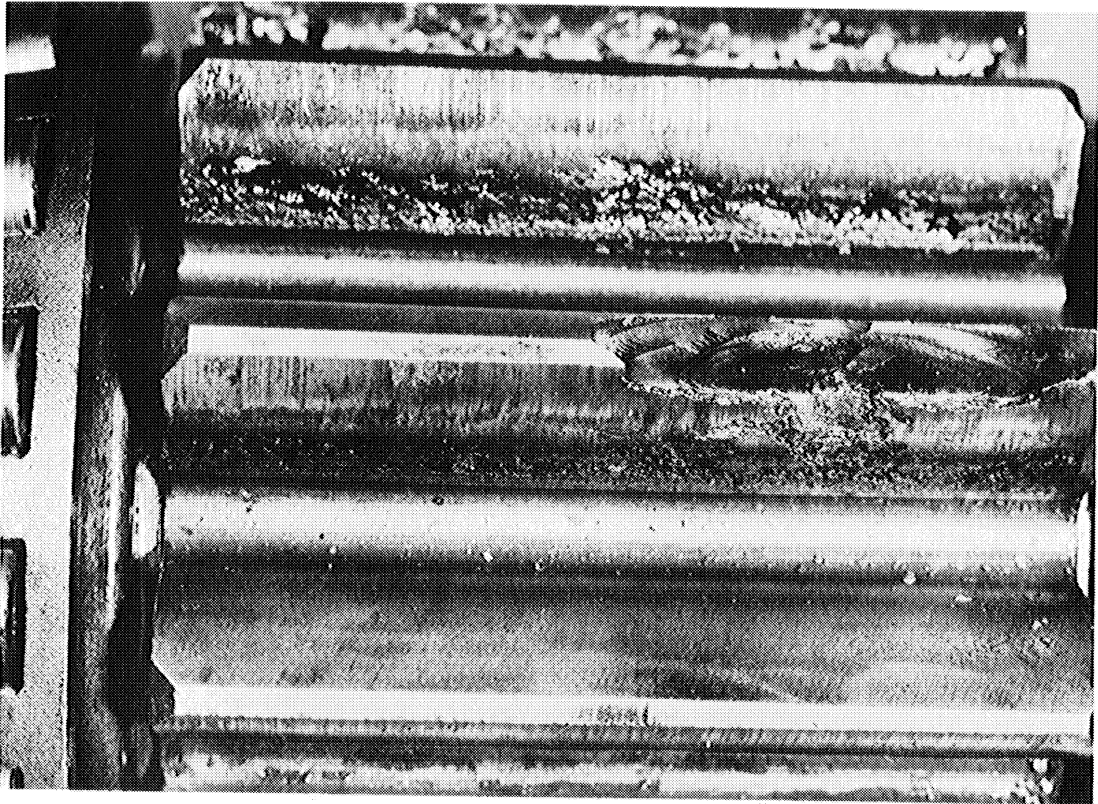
Sprocket drive pinion showing fatigue fracture originating from severe pitting.
